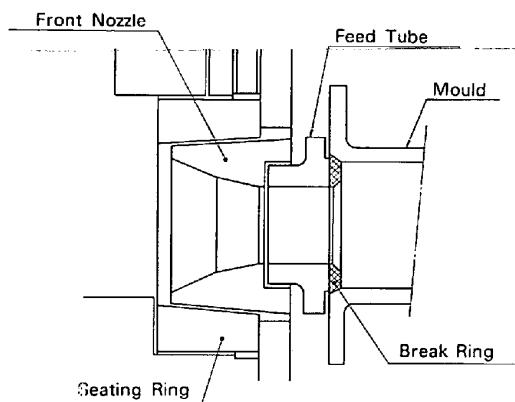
Section of tundish-mould arrangement¹³⁾.
